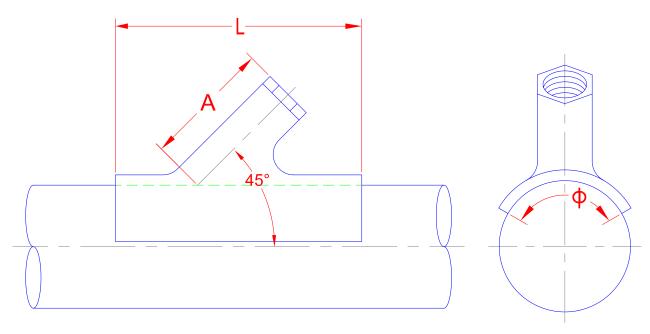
SS Saddle with 316 Stainless Steel Bushing, Threaded Reducing
